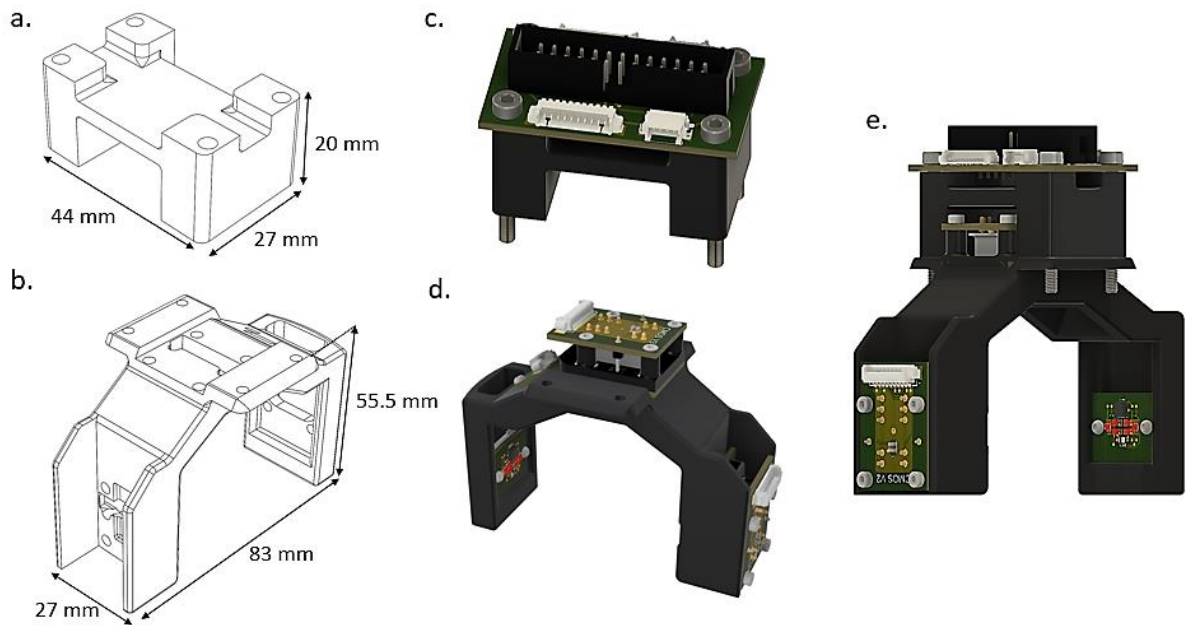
Electronic mounting tray and connector board spacer design (a) Dimensioned drawing of connector board spacer (b) Dimensioned drawing of mounting tray. (c) 3D CAD Model Render of spacer and mounted connector board. (d) 3D CAD Model render of mounting tray with sensing components mounted. (e) Assembled mounting tray and spacer with electronics mounted.
